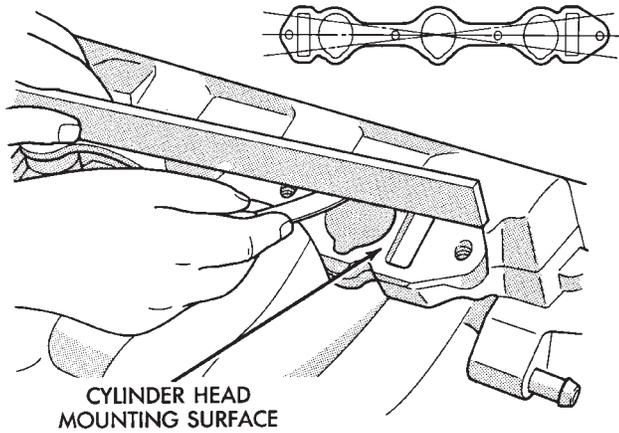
Check Intake (Cross) Manifold Mounting Surface
